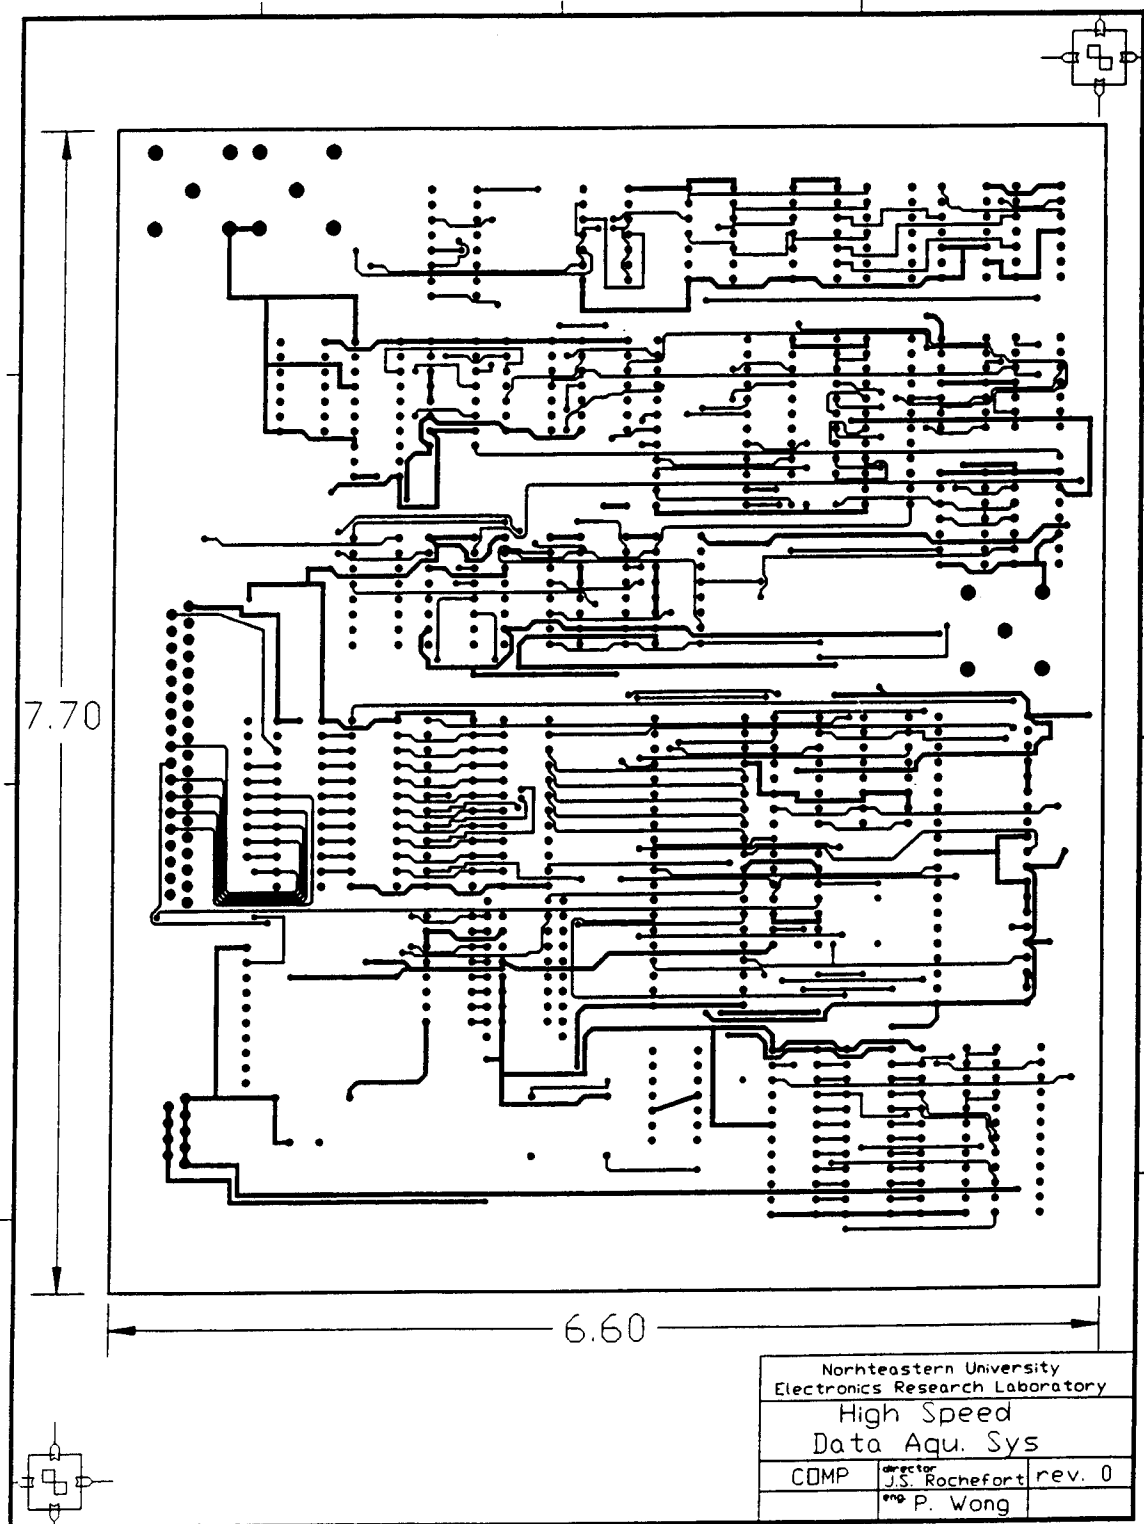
Component Side Layer for the High-Speed FIFO Memory and Control Circuitry Printed Circuit Board
